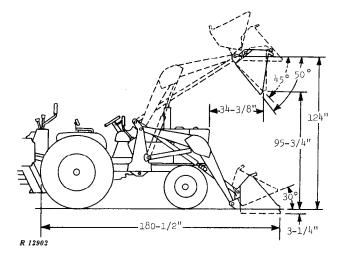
Loader Equipped with 7/8 Yard Bucket
